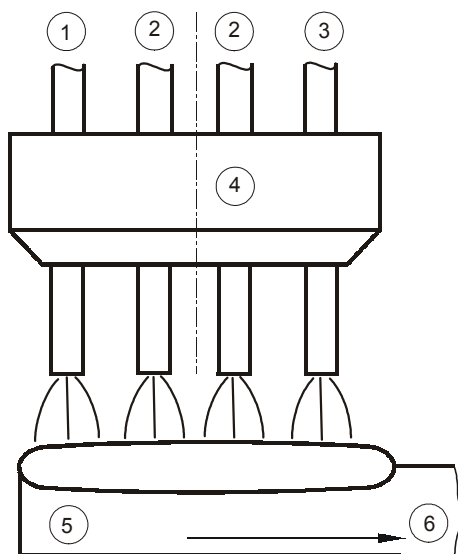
It is possible to obtain an asymmetrically alloyed surfacing weld by using different alloyed wires: 1 - high alloy wire - high hardness of the surfacing weld; 2 - high alloy wire - high toughness of the surfacing weld; 3 - wire having a composition similar to that of the base metal; 4 - contact tube; 5 - workpiece; 6 - direction in which hardness of surfacing weld decreases but its toughness increases
